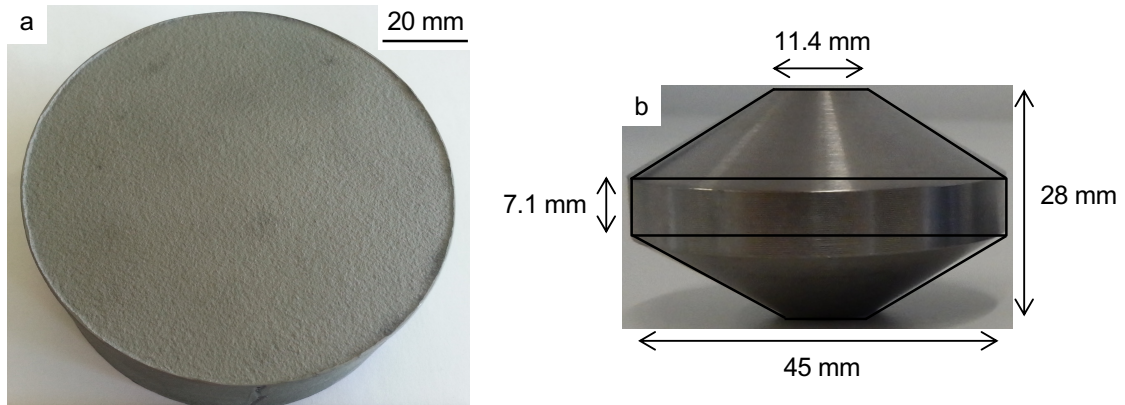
Examples of (a) a specimen produced by FAST, and (b) a double truncated cone machined from the FAST billet for forging
